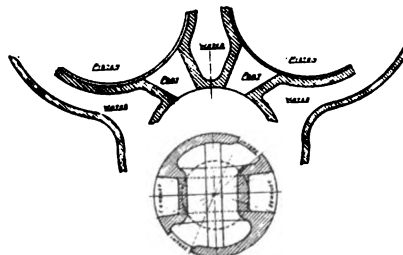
SHOWING VALVE IN PLACE BETWEEN TWO CYLINDERS
